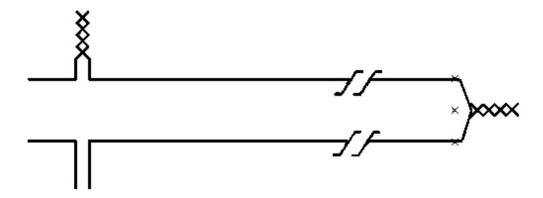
Attaching Connector Wire To Deployment Wire Courtesy of GENERAL MOTORS CORP.
